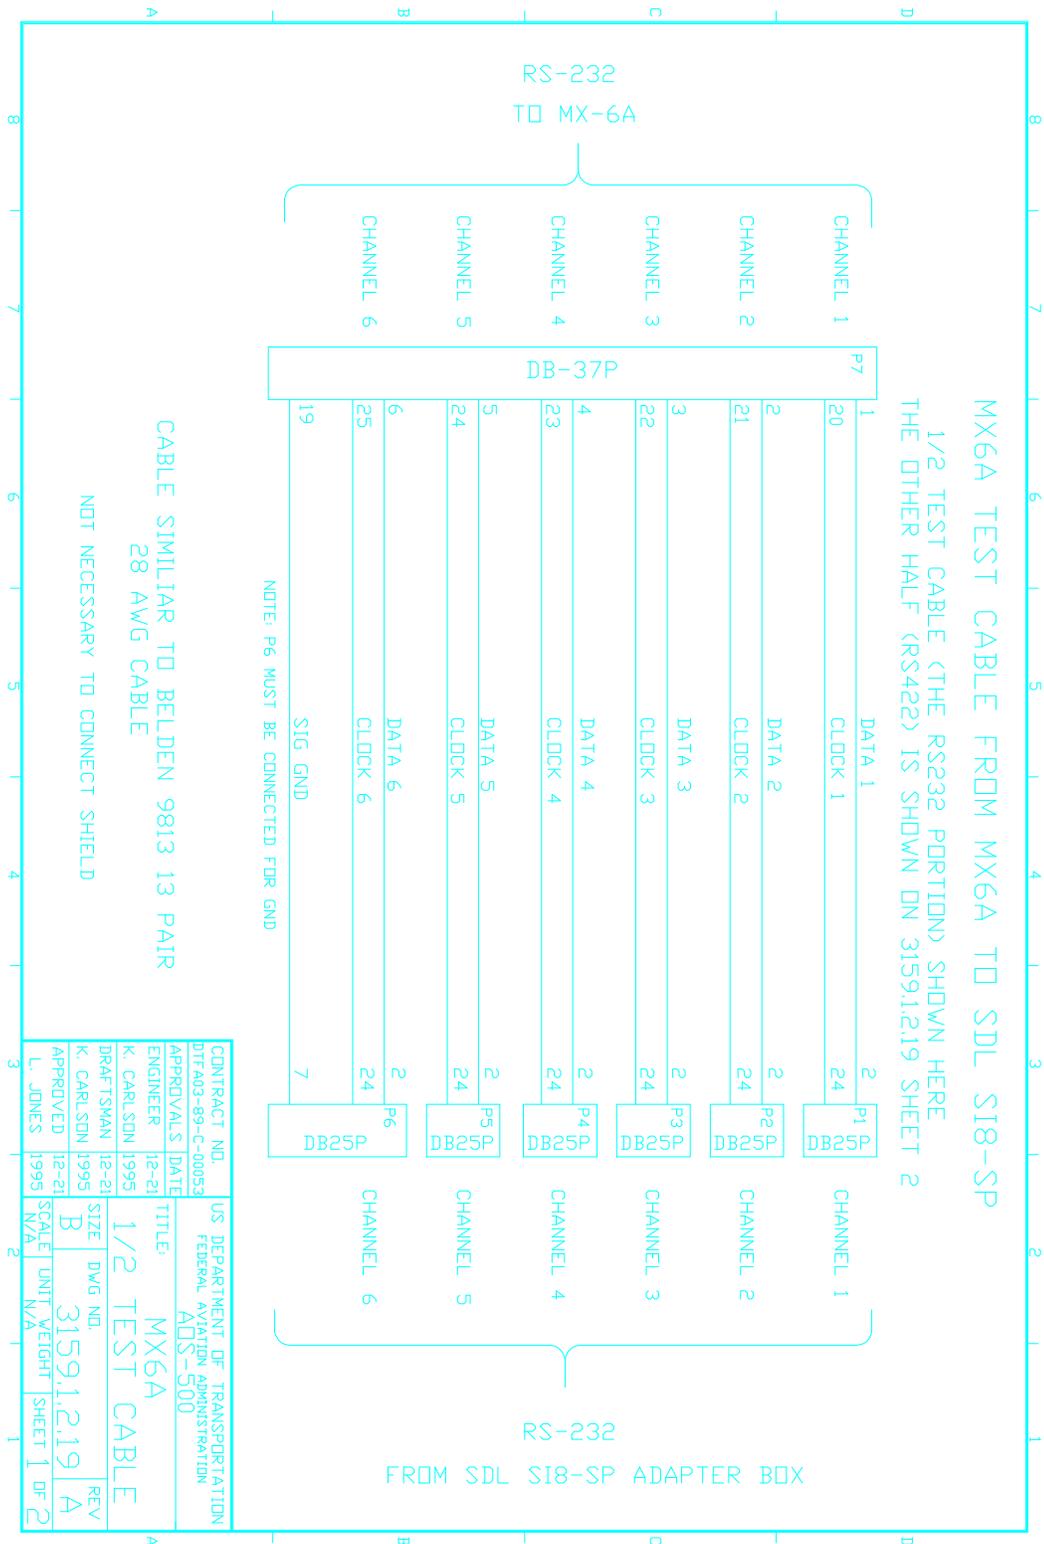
21 RS-232 1/2 TEST CABLE (DWG 3159.1.2.19 SHEET 1 OF 2)
